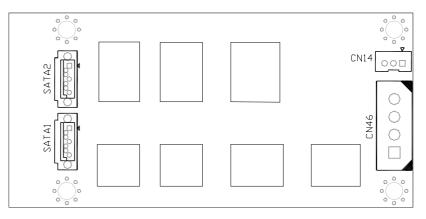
Rear side layout (connect to the RAID card or motherboard)
